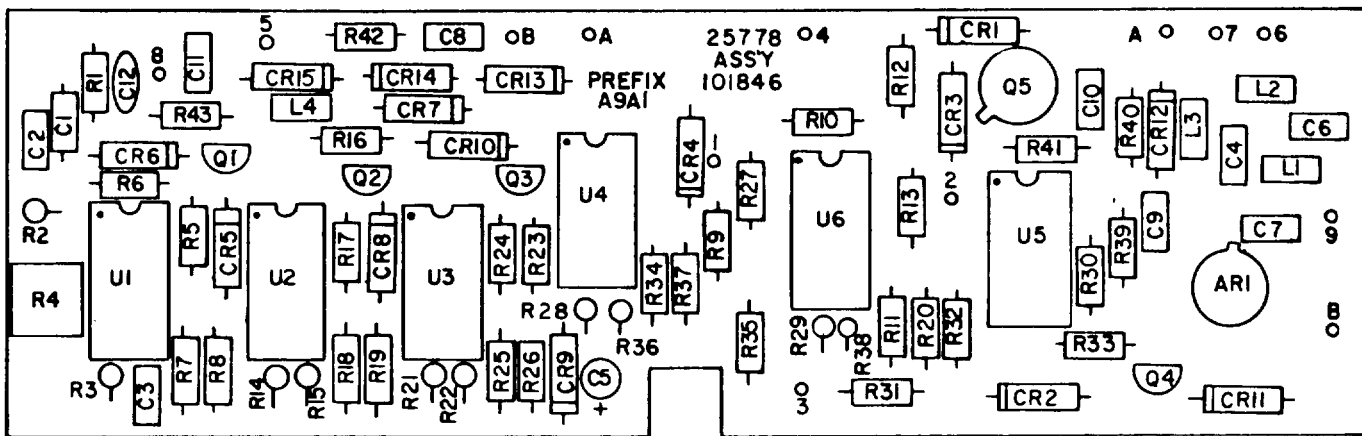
Variable Oscillator Divider Assembly A9—cover removed.
